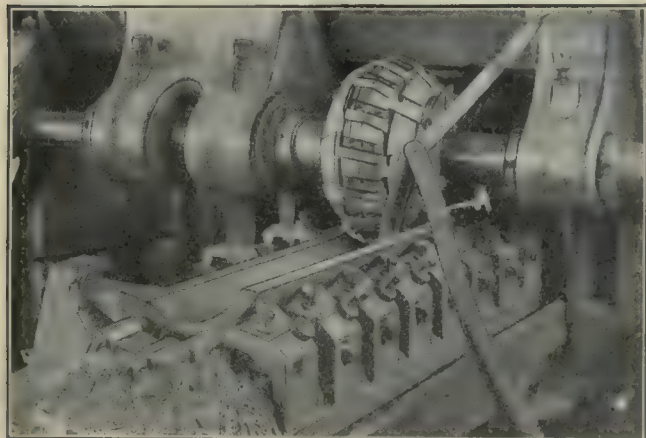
MILLING THE FACE OF AN IRONING SHOE
